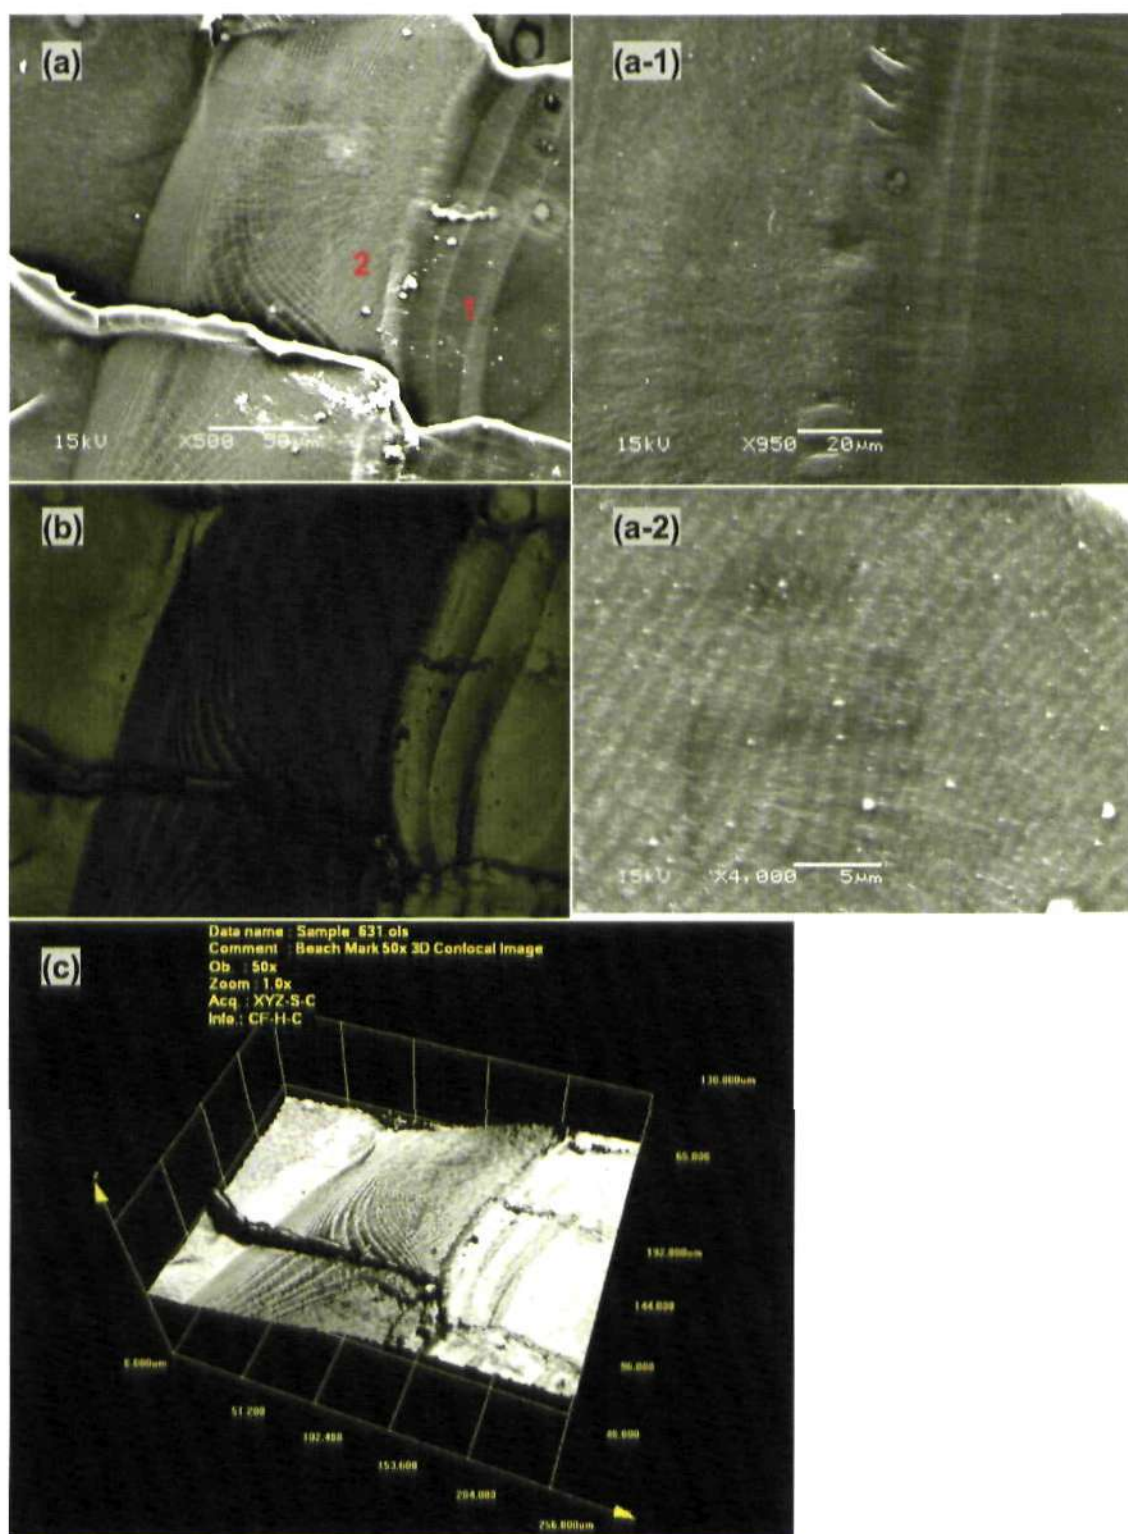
Fractography for a crack tip region on the fracture surface of the specimen PCCT-2* (a) taken by scanning electron microscope; (a1-a2) a close-up view of zone 1 and zone 2 at higher magnification; (b)-(c) 3D images using confocal laser scanning microscope.
